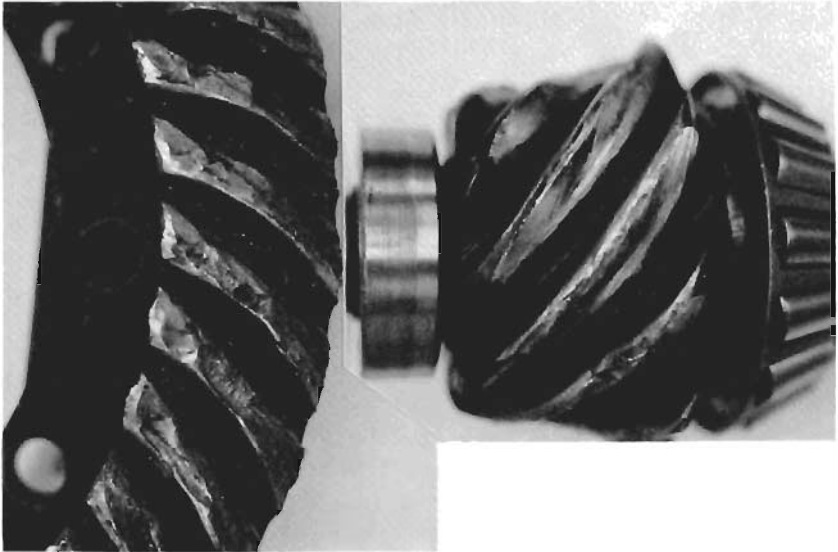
Spiral bevel pinion (0.75 \times) and gear (0.70 \times) from a stock item differential manufactured properly for and adjusted to a right-hand drive. It was installed in a left-hand drive situation. The reverse-side pattern had not been corrected for this application.
